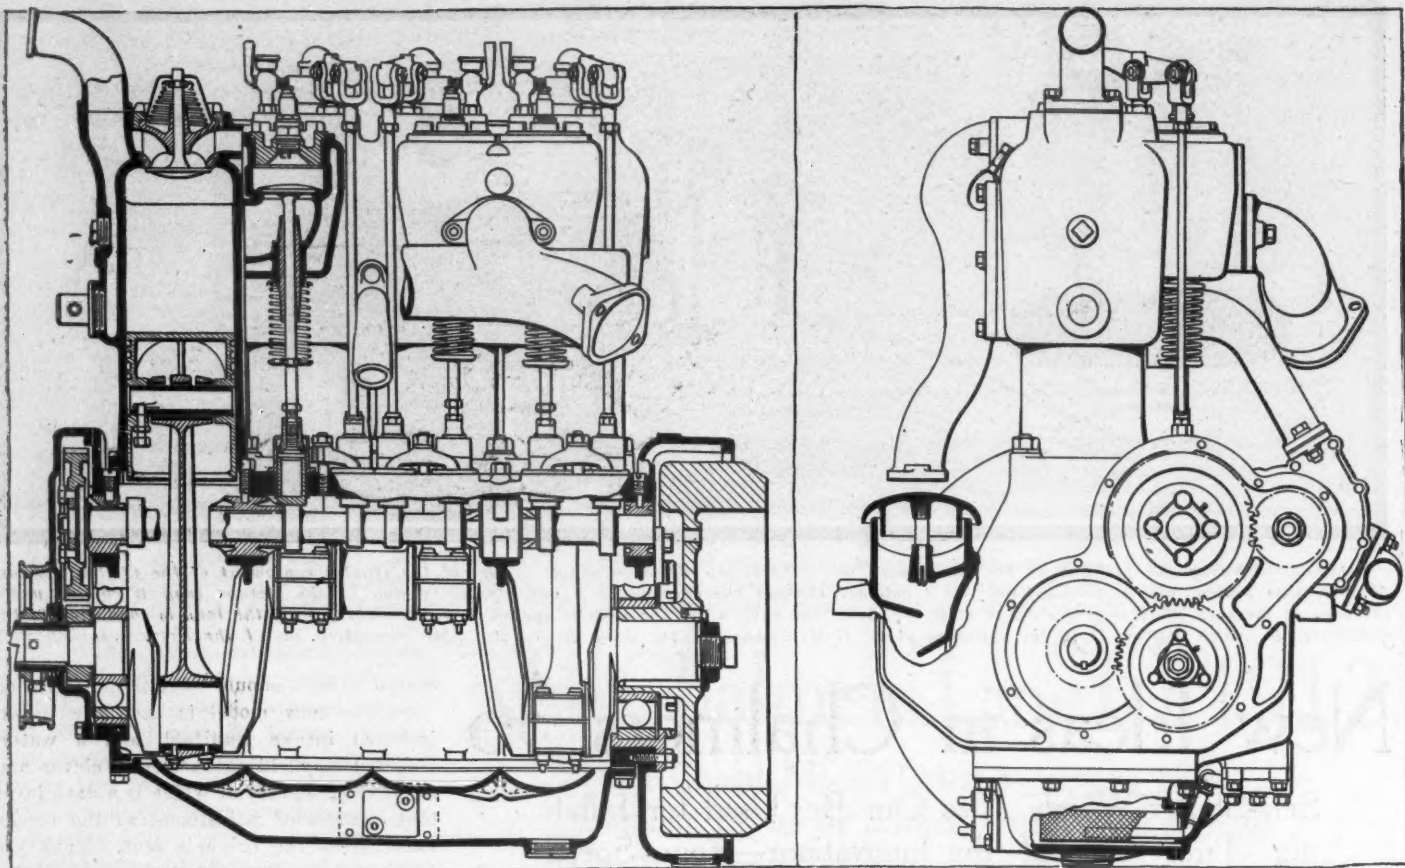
Sectional side and end views of the Chalmers 36 motor, showing many interesting details of construction. With the inlet valves in the heads and the exhaust valve on the sides the valves are unusually large; inlet valve springs, guides and stems are protected from dust and dirt by brass caps. Valve tappets and pushrods are adjustable, pistons have four compression rings; the crankshaft is mounted and has two large ball bearings; the flywheel is enclosed; oil reservoir detachable; the oil filler and breather very large, and all piping short and direct
